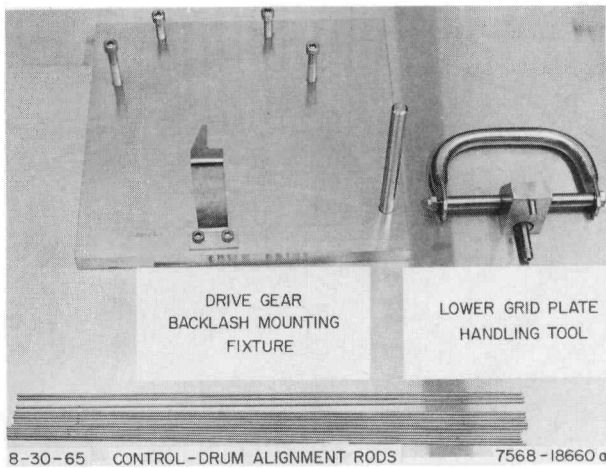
S8DS Drive Gear Backlash Mounting Fixture, Lower Grid Plate Handling Tool, and Control-Drum Alignment Rods
